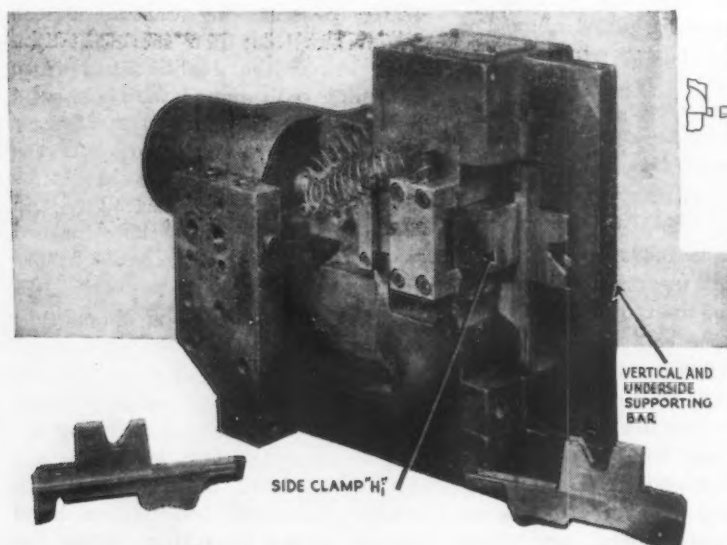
The fixture for performing Oper. 13B shown and for Oper. 13C (Fig. 8) are both mounted on the right hand table of the same machine carrying the fixtures shown in Figs. 5 and 6 on the left-hand table. Oper. 13B involves finish broaching the sides of the magazine legs.
